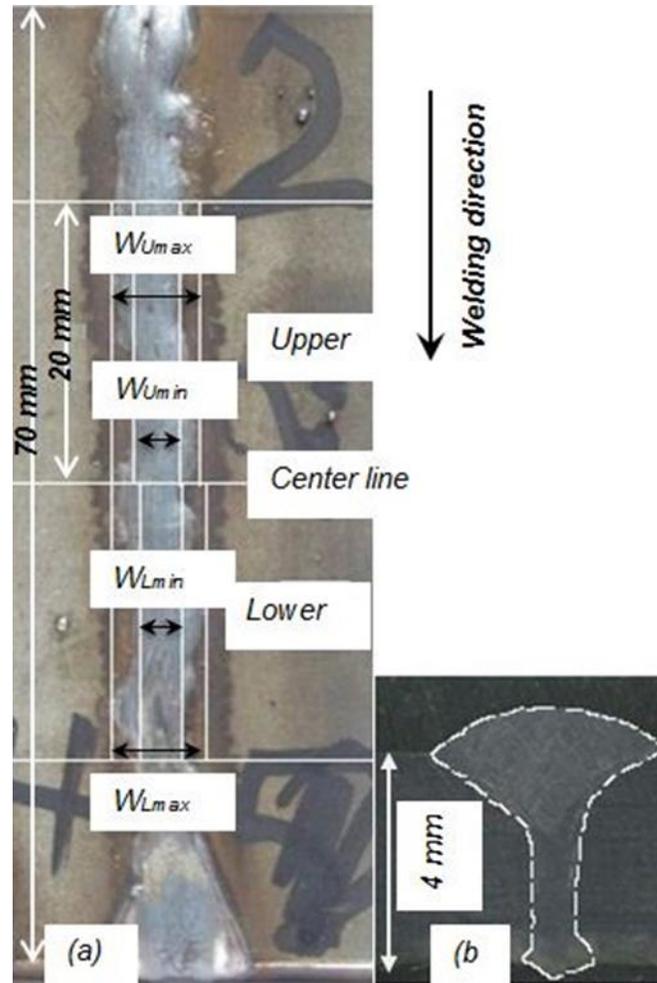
(a) Weld top surface appearance and the definition of stability through upper and lower weld width variation, (b) typical laser hybrid arc weld cross section
